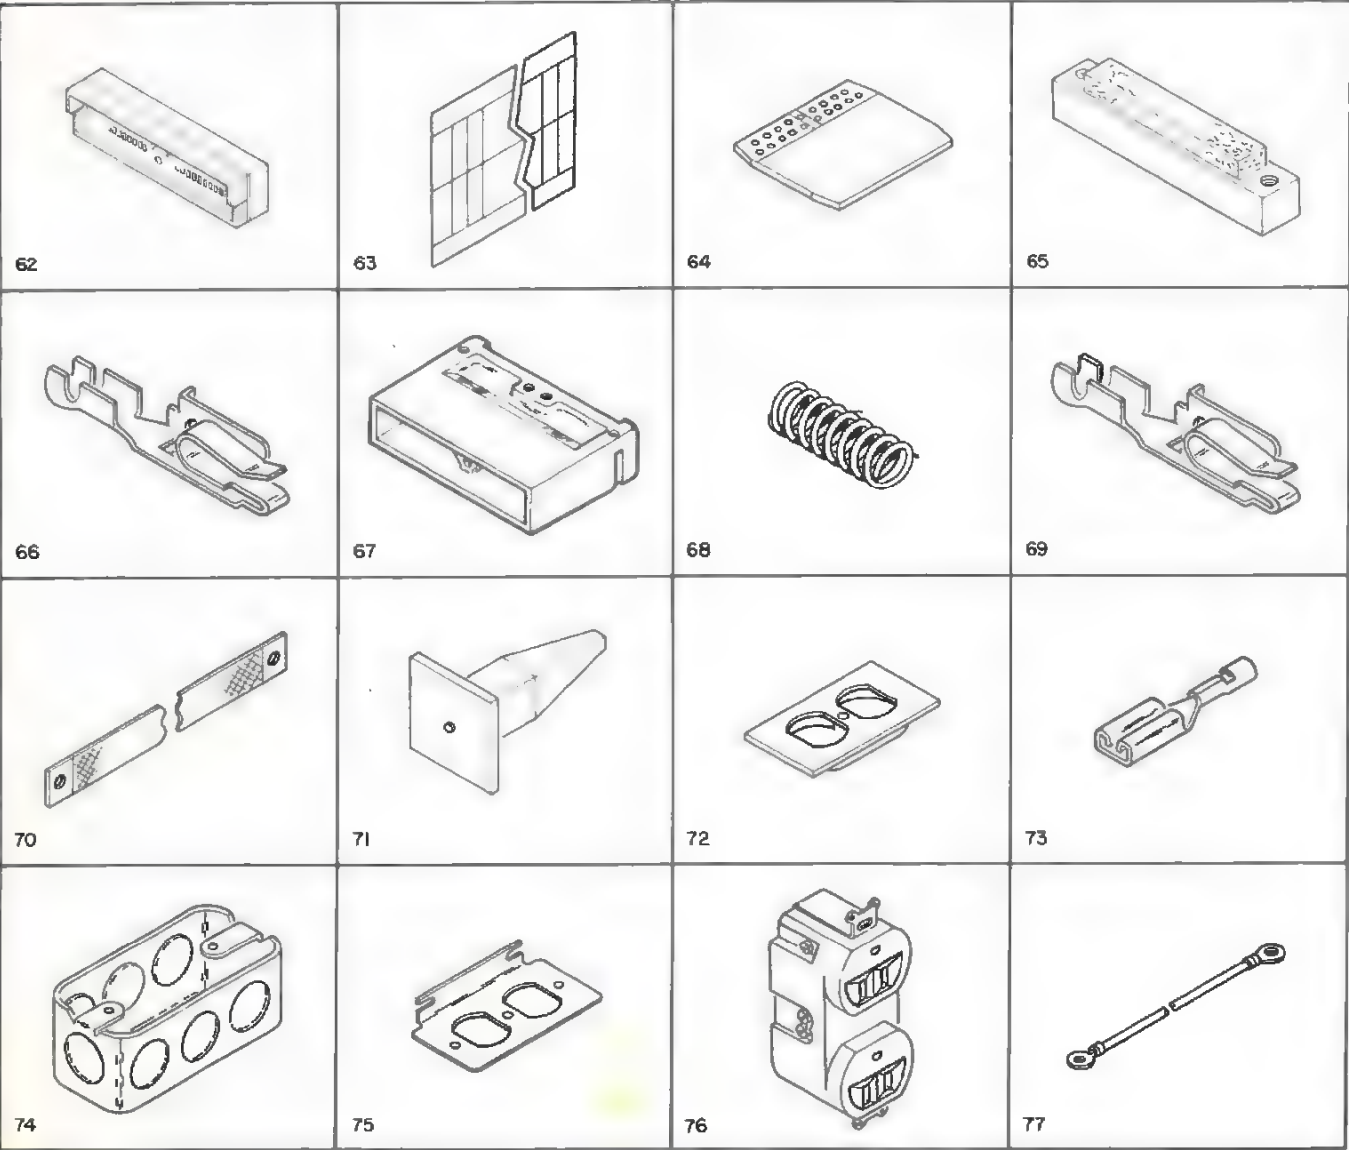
CABLE AND JUMPER ASSEMBLY COMPONENT PARTS. SHEET 3 OF 3. INDEX NOS. 62-77. SEE LIST 12.
